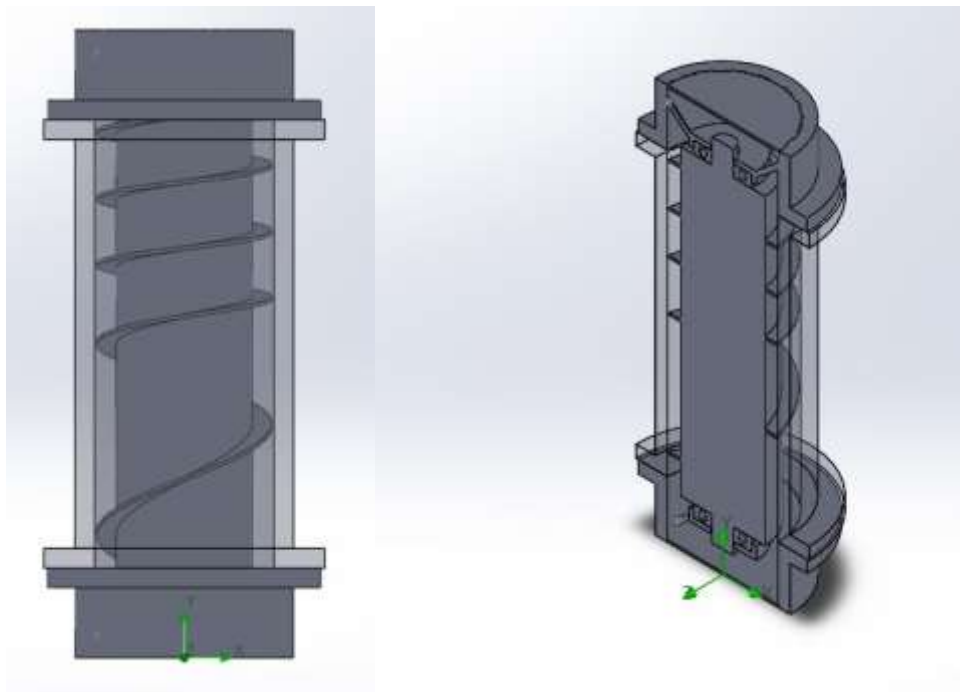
Assembly of underpressure helical turbine with pitch 0.17-0.56m
